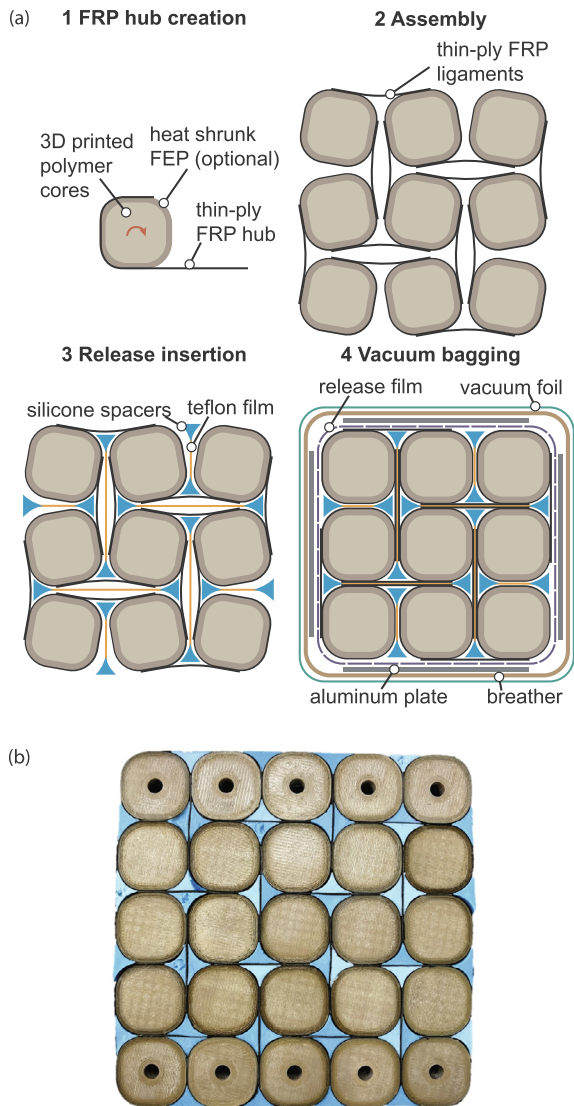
Single cure fabrication procedure of FRP mechanical metamaterials. (a) Assembly procedure. (b) Assembled 5×5 rotating square metamaterial before cure.
